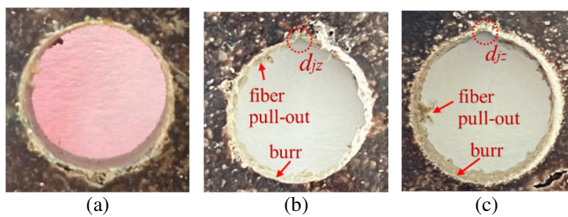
Hole characteristics (12 mm) in single-layer WPCs: (a) drilled with a 12 mm drill bit, (b) WJ at $P = 350$ MPa and $V_i = 30$ mm/s, and (c) AWJ at $m_a = 6.67$ g/s, $P = 350$ MPa, and $V_i = 30$ mm/s.
